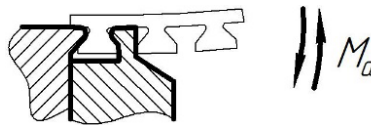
Scheme of fixing and loading of the specimen on the vibration test bench
